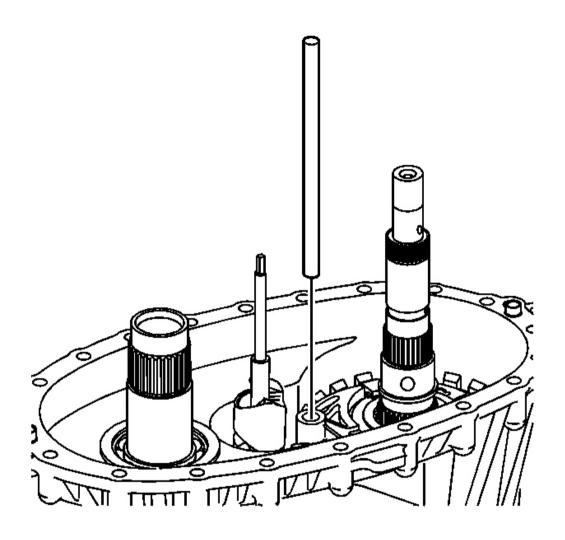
View Of Shift Fork Shaft Courtesy of GENERAL MOTORS CORP.
